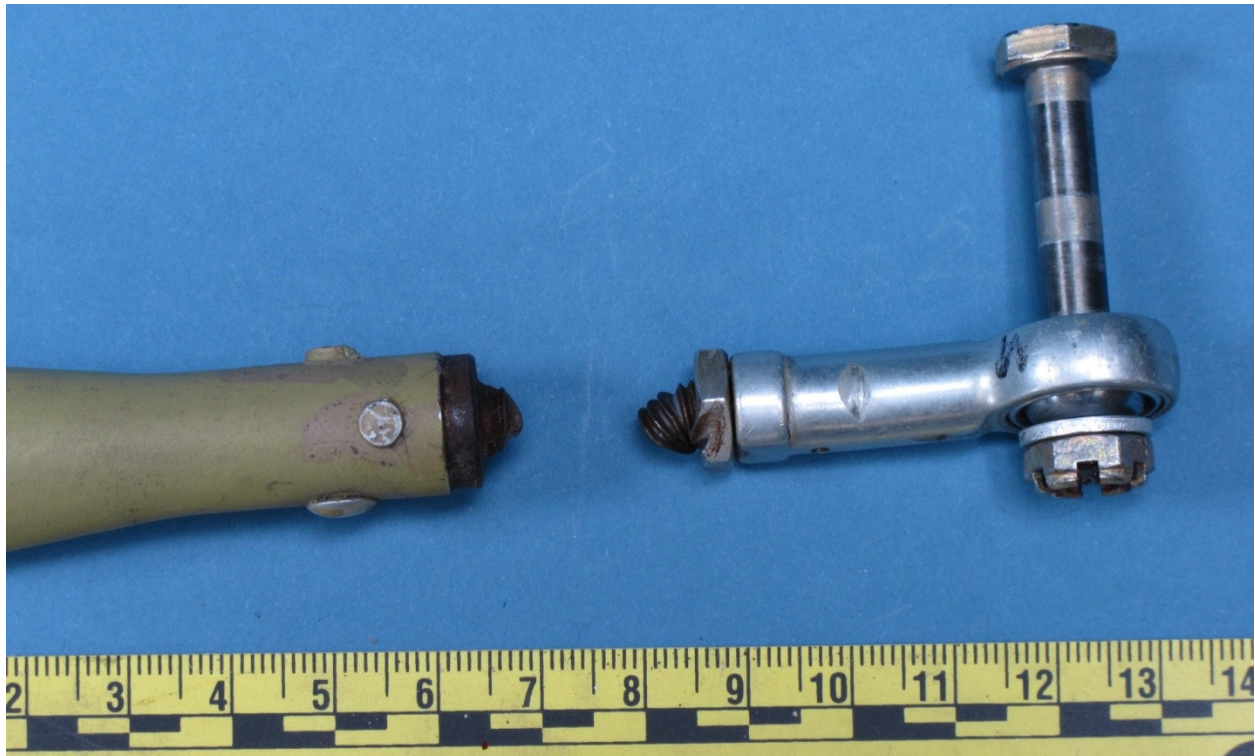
The fractured end of the pushrod, as received. The threaded end shows indications of bending in the threads.
